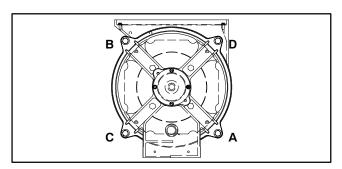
End Bracket: A, B, C, D Tightening Sequence
